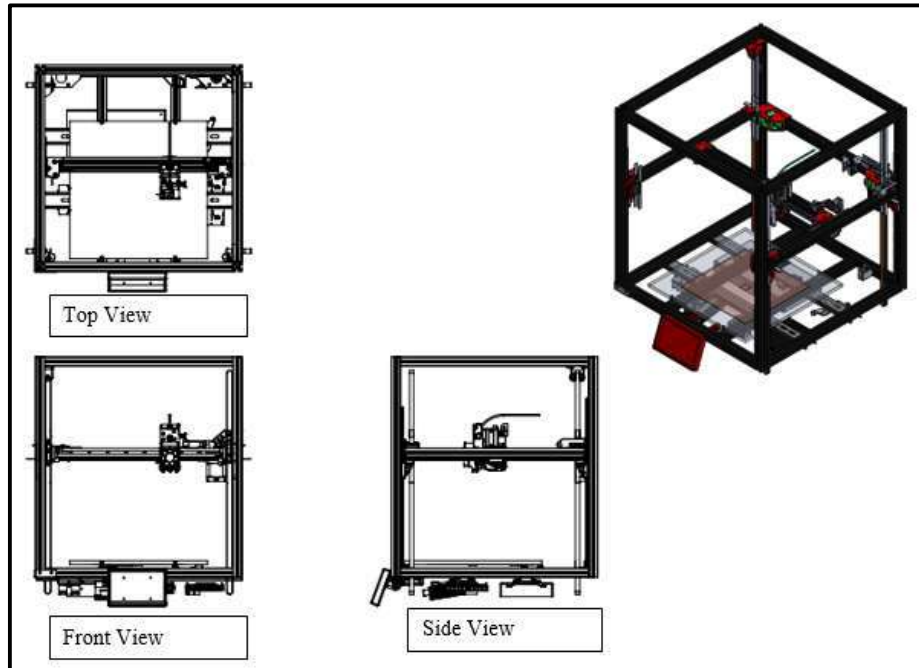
Top, Front, Isometric, and Side View of Frame
